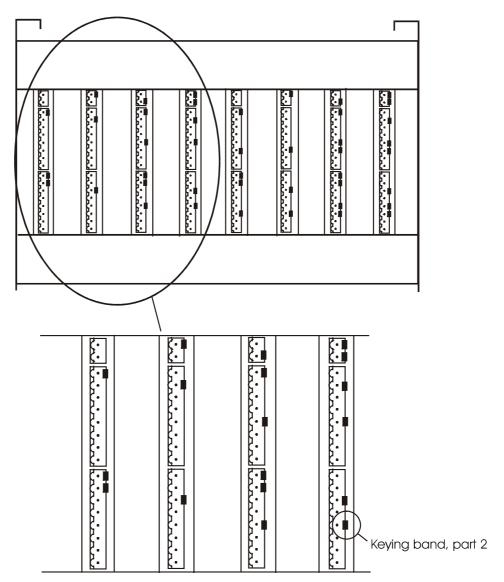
Top view of the DELTA Basic-4 housing with keyed connectors.
